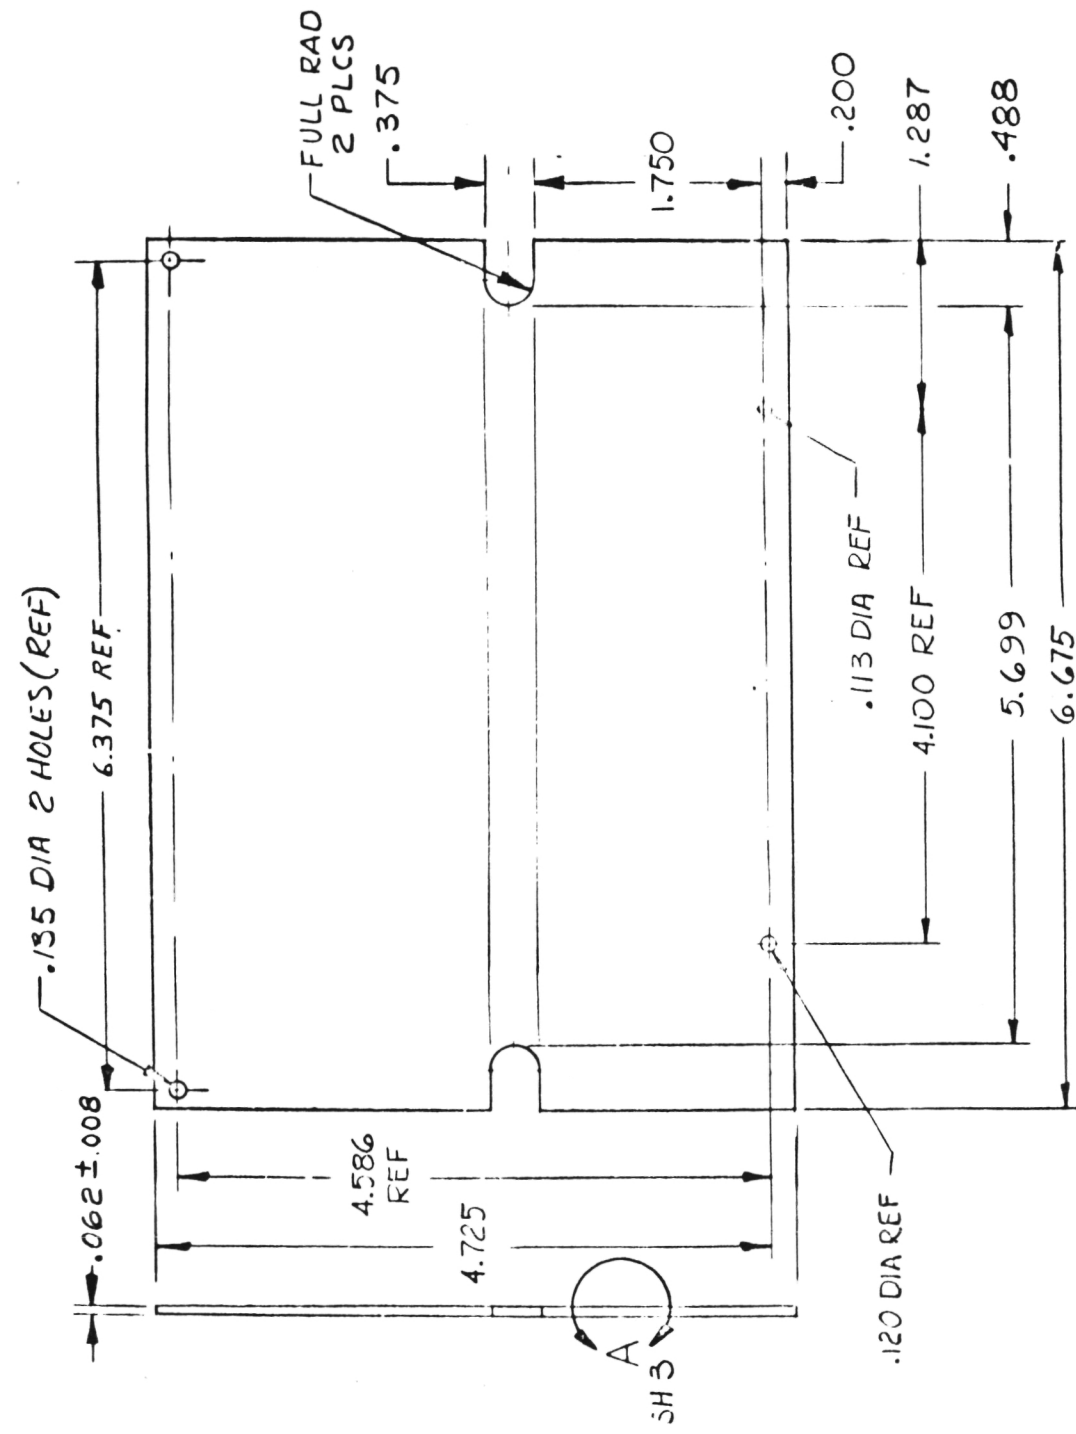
Fabrication Drawing of FASCOS Multiwire Board
